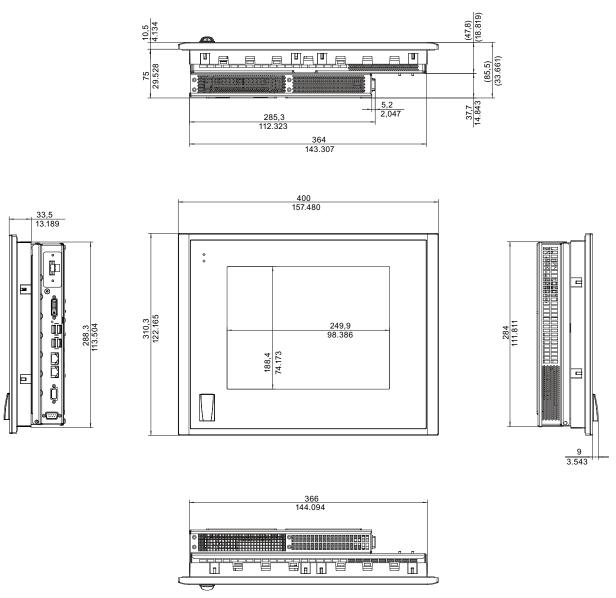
Dimension drawing of the touch screen device with 12" display
